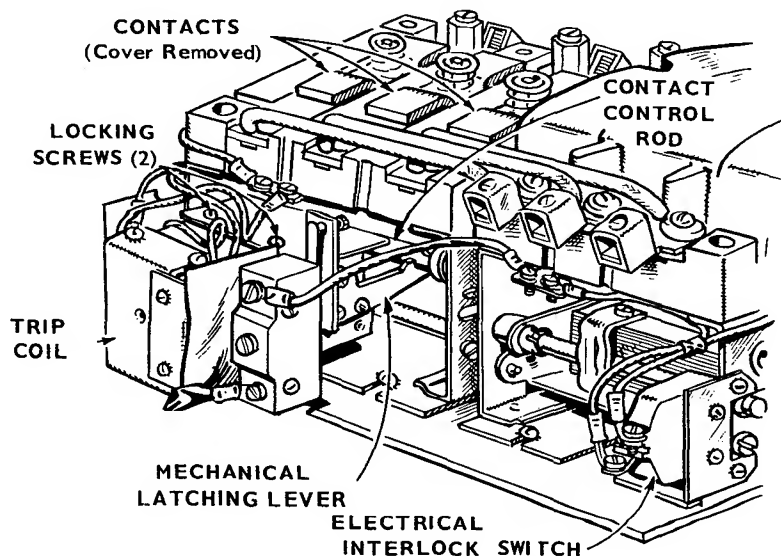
MECHANICALLY-HELD (LINE-SIDE) TRANSFER SWITCH
